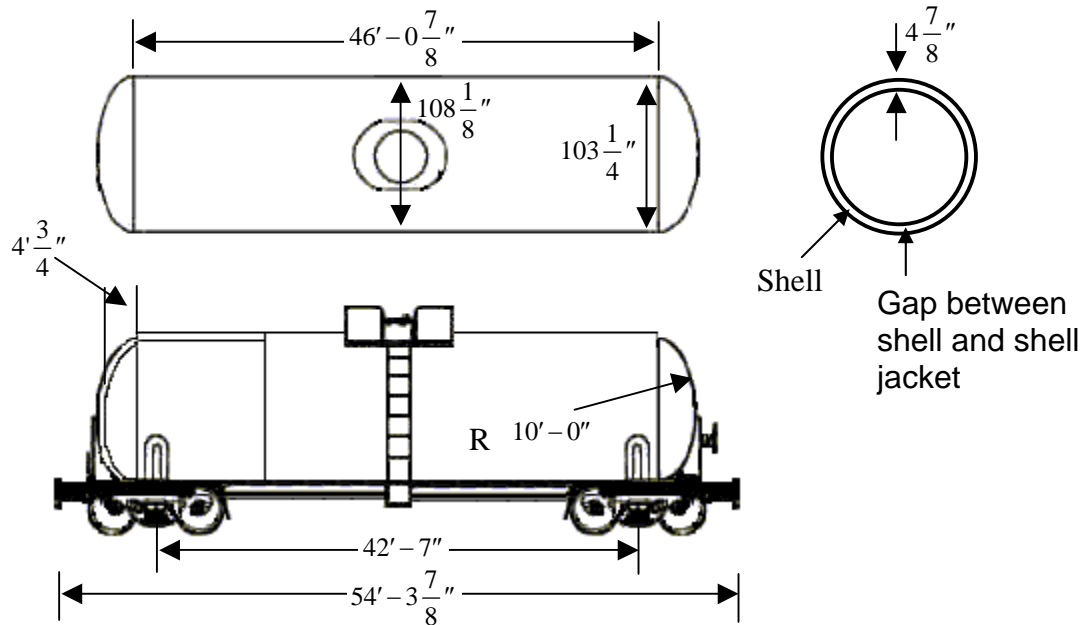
Dimensions of the Tank Car Used in the Impact Tests
